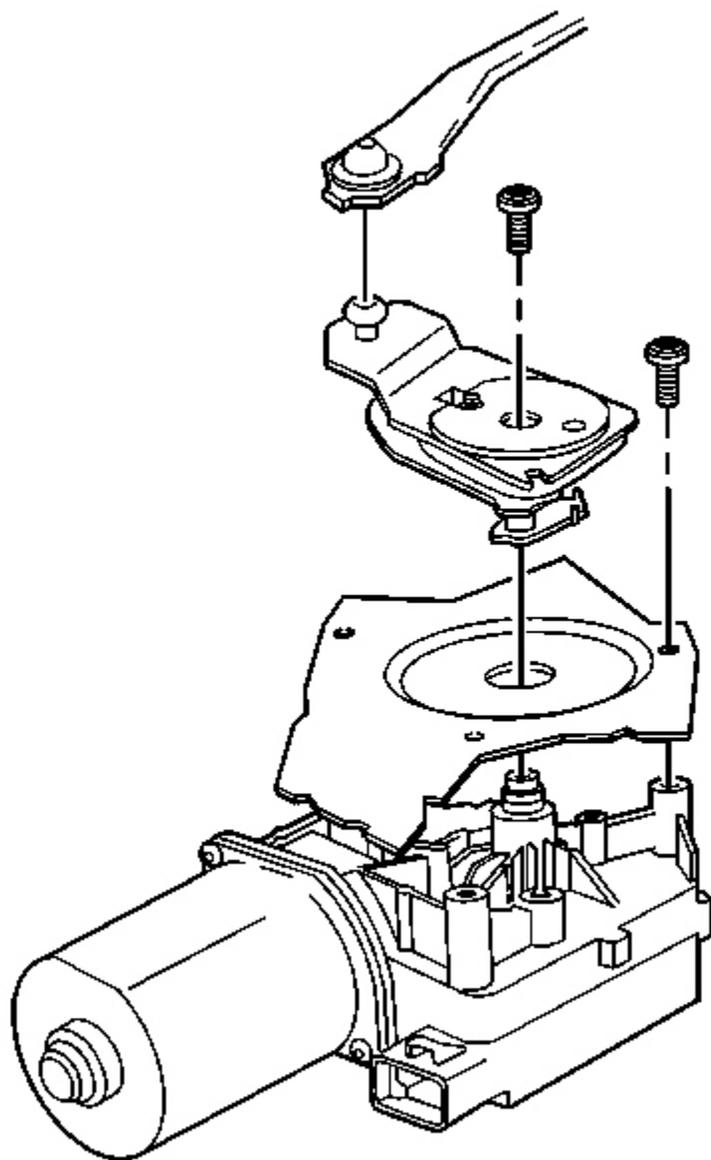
Wiper Motor Splash Shield To Wiper Motor
